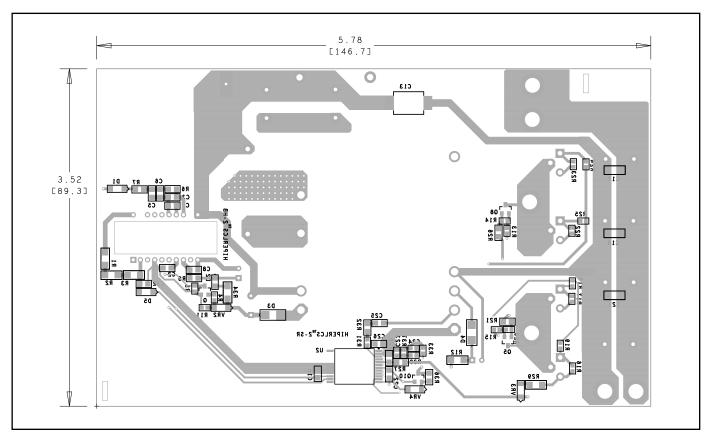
PCB Layout 1650 W / 60 V (Bottom View).
